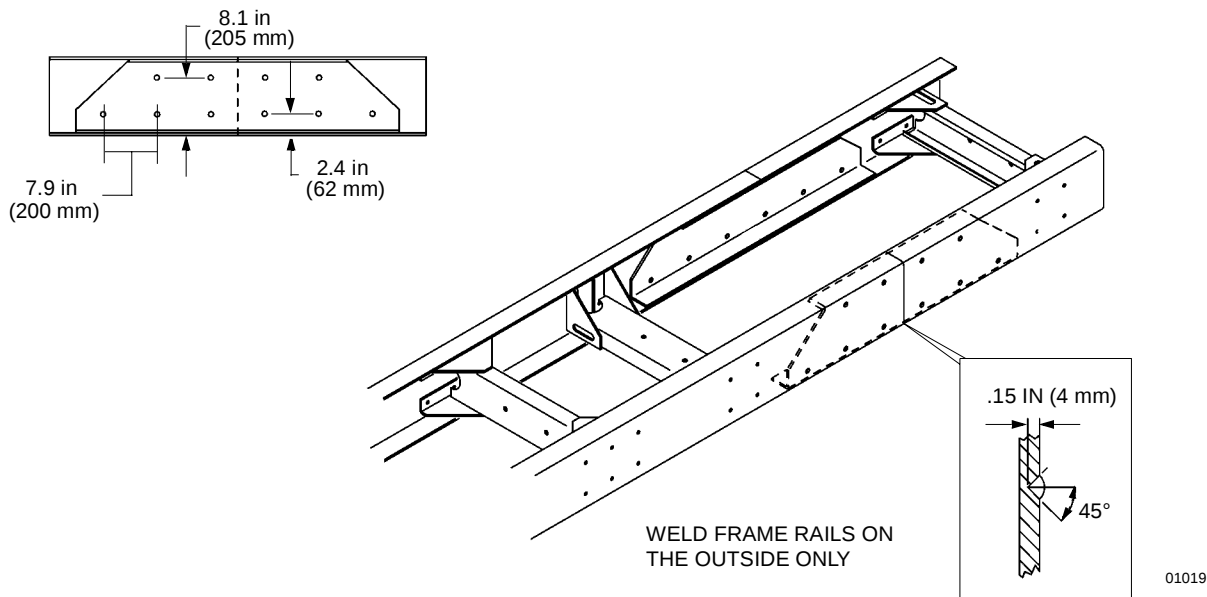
Detail of Frame Extensions and Joint Welding.
